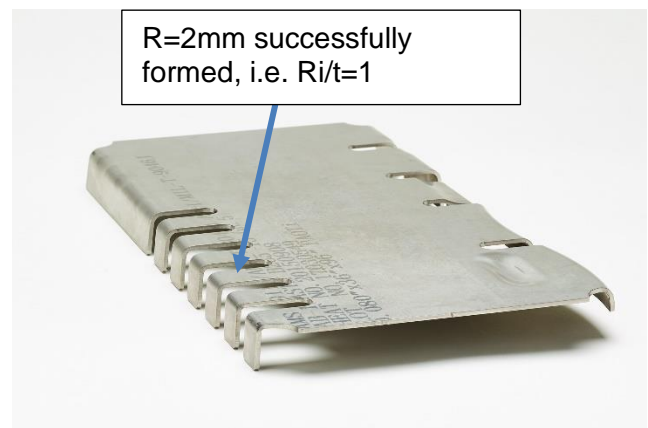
In order to check the material formability the test tool is designed with a bend radii, ranging from 1mm to 3.5mm, in steps by 0.5mm.
